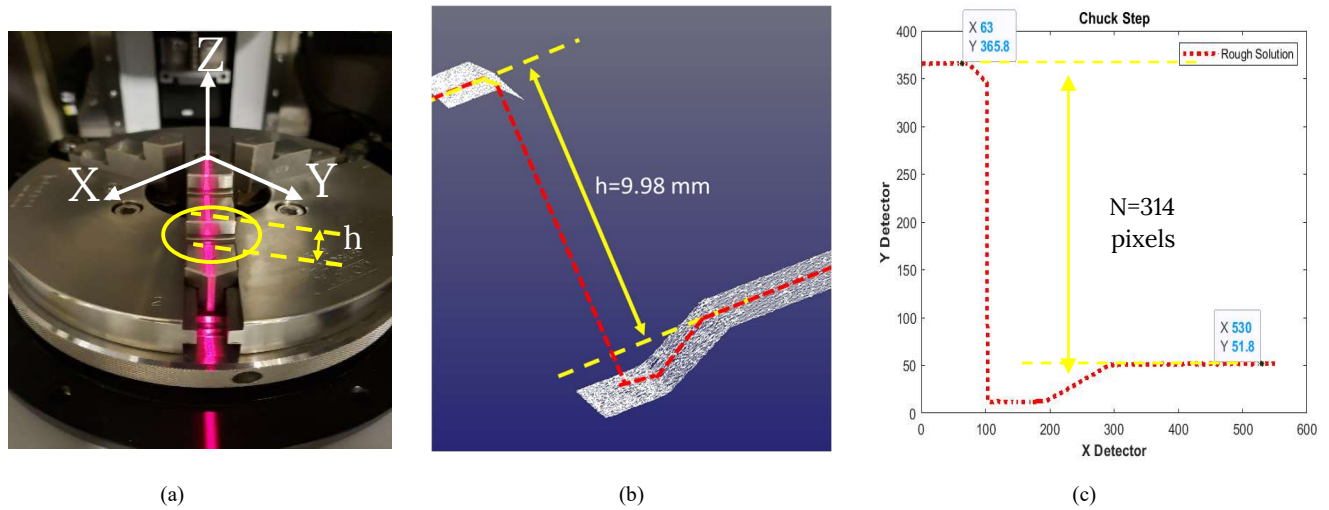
Measurement of machine chuck step using Nikon HN Machine
